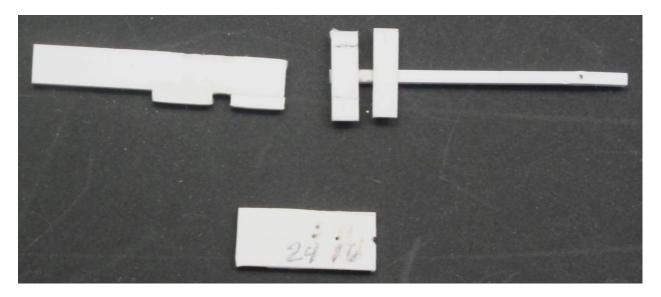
Stake Pocket forming / shaping tool (top), and grab iron bending tool (bottom)
